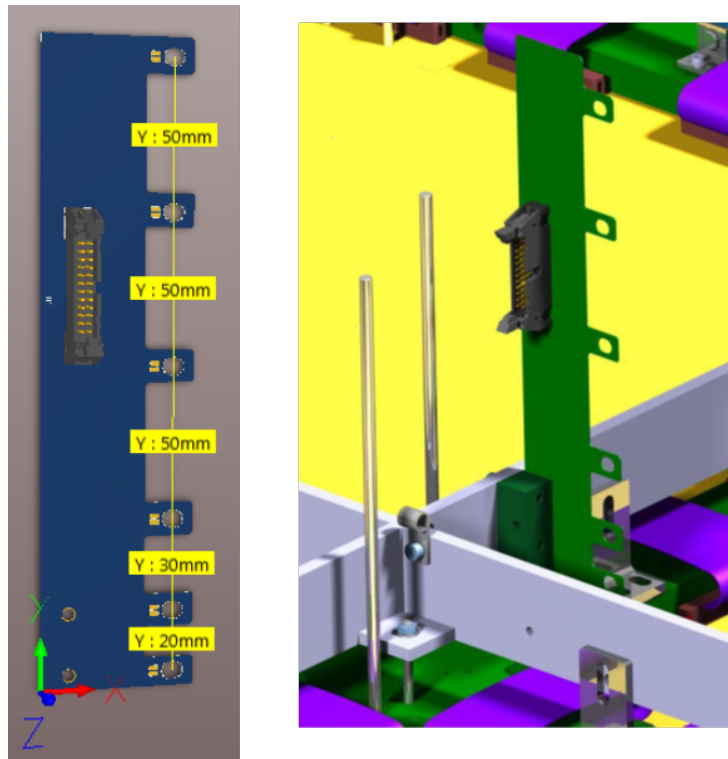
View of the thermometer board and the positions of the Pt sensors along the PCB plate.
